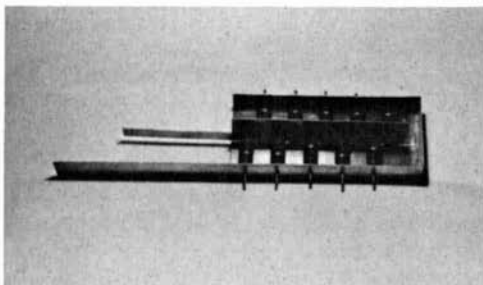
Install the center copper strip with resistors into the U-shaped box.
